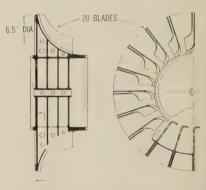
Small sheet-metal-brazed radial-flow impeller.
